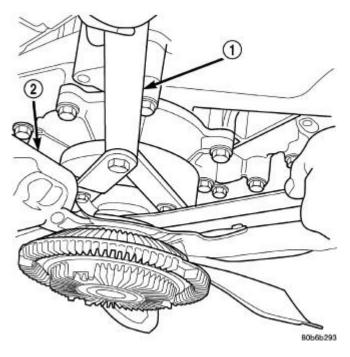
Using Special Tool 6958 Spanner Wrench & Adapter Pins 8346 Courtesy of CHRYSLER LLC
